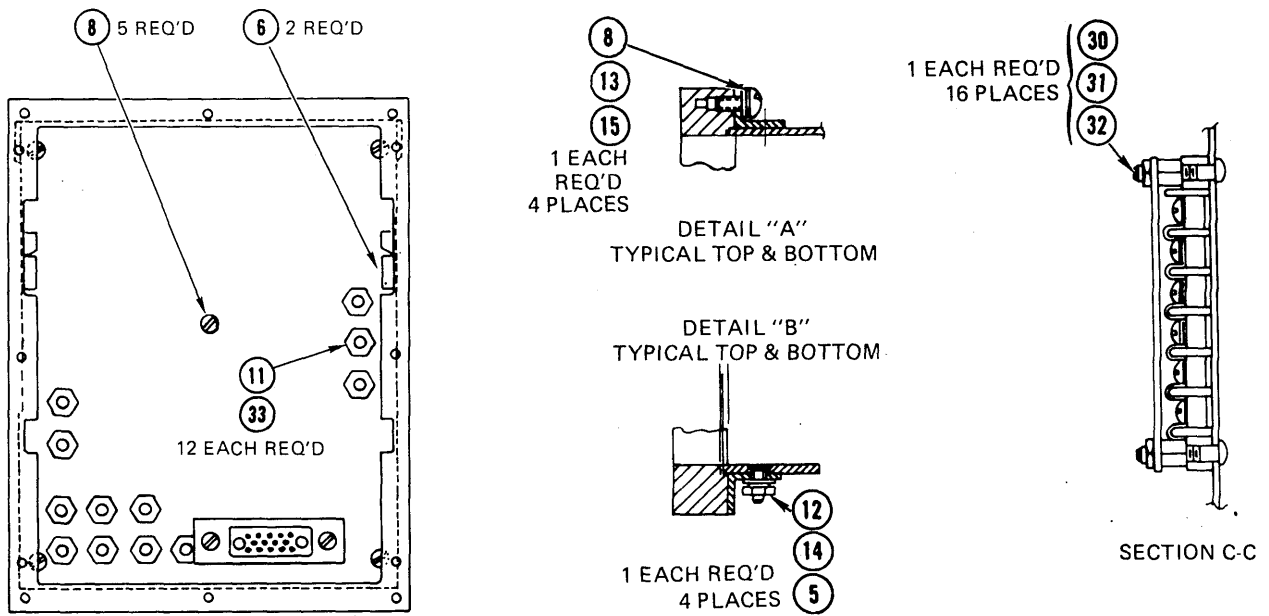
Card Rack Case Assembly (Sheet 2 of 2)
